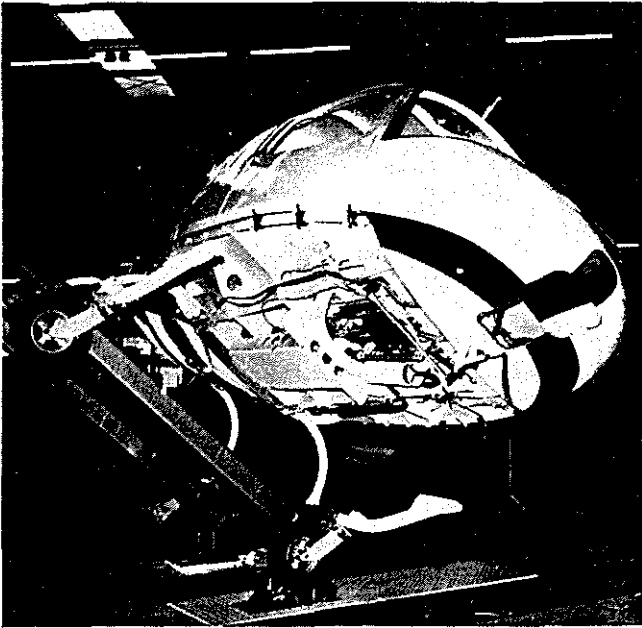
FINAL ASSEMBLY IN THE SELF-CONTAINED PRODUCTION UNIT
